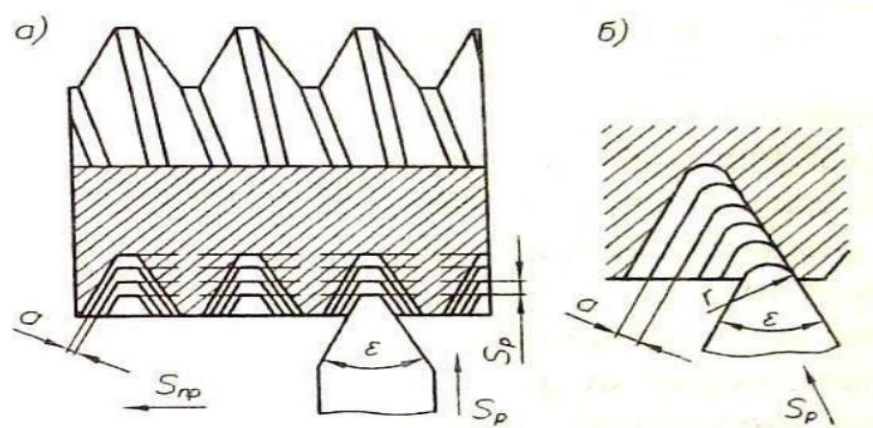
Scheme of multi-pass cutting cutter external helical grooves: a - radial cutting; b - side cutting
